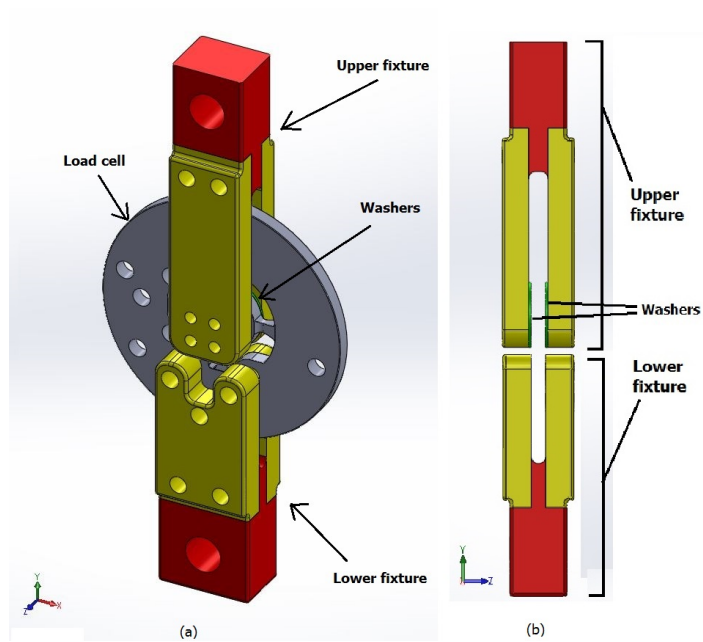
(a) Assembly for applying load in x and y directions (modified fixtures),
